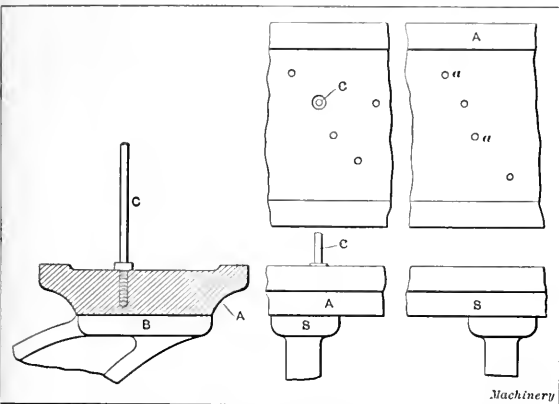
Machine Bed for which the Drilling and Tapping Fixture was designed
